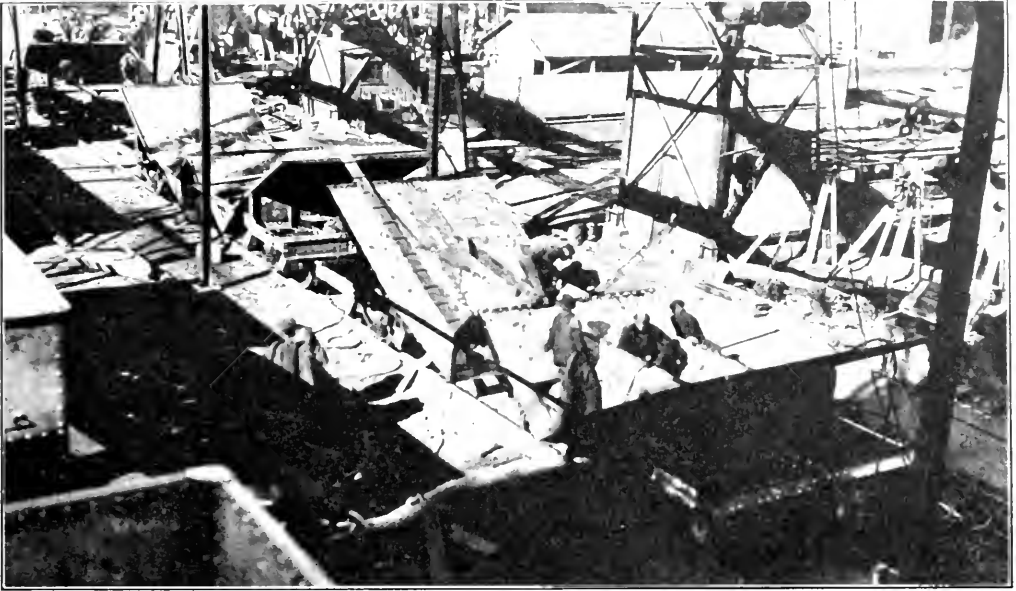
ERECTING STATION No. 7 WHERE THE HOPPER SHEETS AND FLOOR SHEETS ARE RIVETED.
